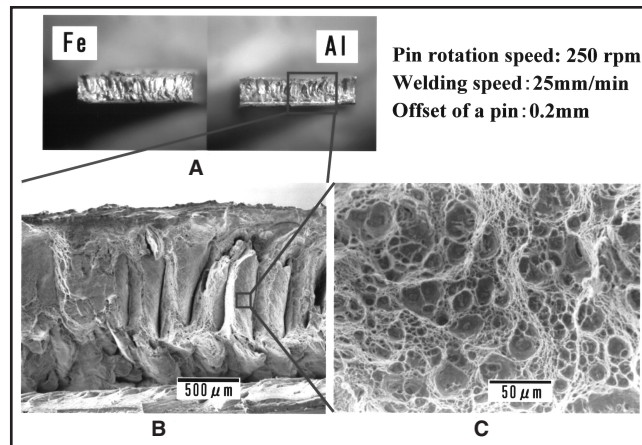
Fracture surface of the weld made under the optimal welding conditions: A — macrophoto of fracture surface; B — SEM image of fracture surface; C — enlarged SEM image of B. Fracture seems to occur along the interface between the steel fragments and the aluminum matrix, and a dimple pattern is observed in the fracture surface.
